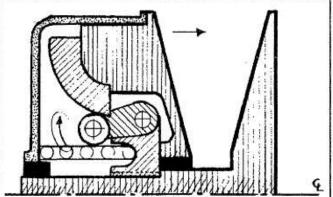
Arctic's hex clutch introduced tunability with separate flyweight and roller. Torque transfer was improved by use of a hex fiber bushing instead of splines.
